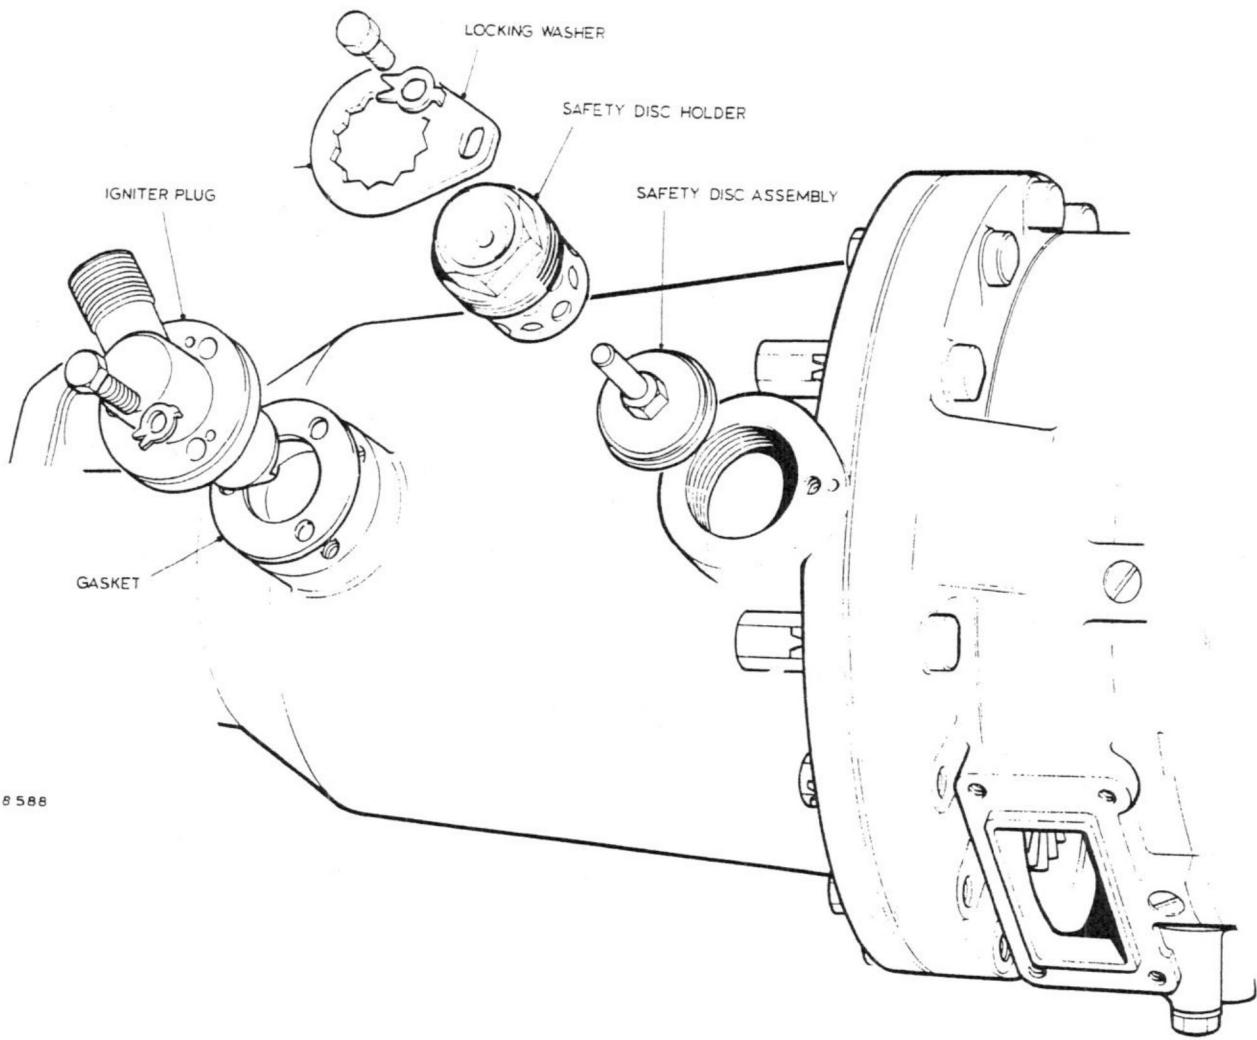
Removal/installation of igniter and safety disc - group 7/E
